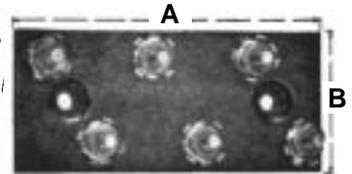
6-point terminal board, Type EB-4, Cat. 2860351G3
